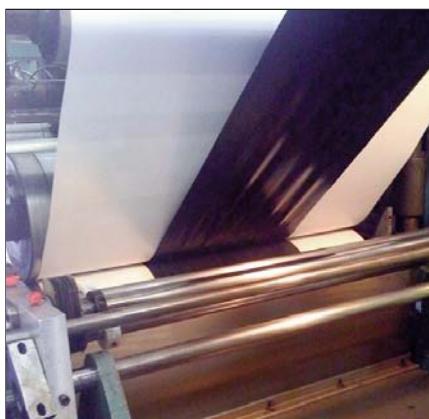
A roll of CNT cloth being prepregged with a commercial resin on industrial machinery.
